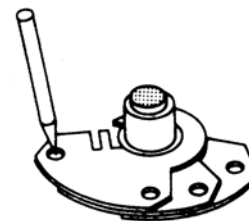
e: Cam disc comprising 3 fan discs
